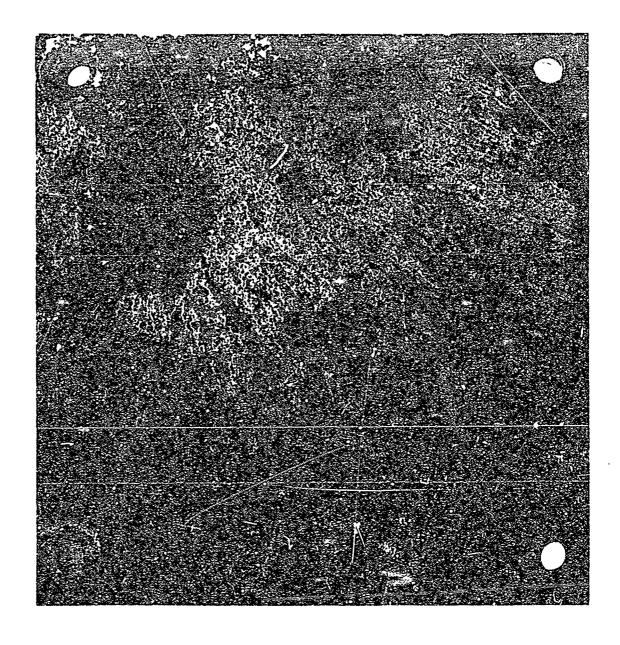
Coating Specimen RSA 64-23-A After Test No. 1
